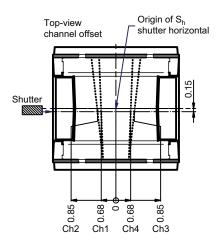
Top View Sensor, Channel Positions and Origin of Horizontal Shutter, tolerances  $\pm$  0.2 mm
